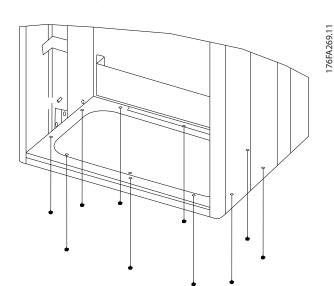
Mounting of Bottom Plate, Frame Size E1.
